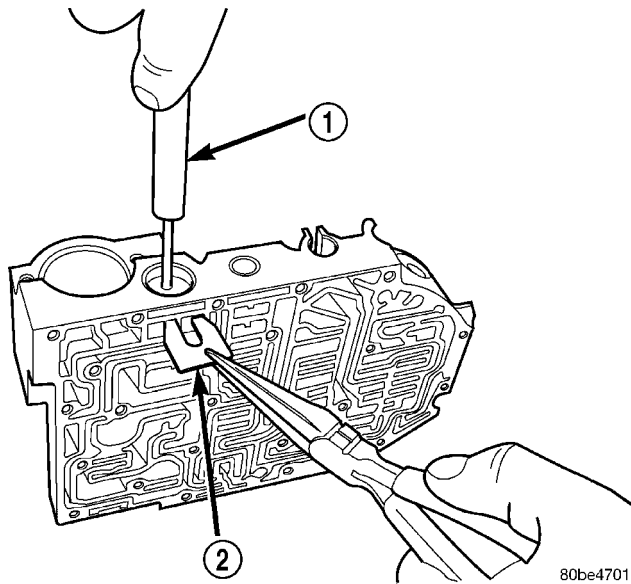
Install Regulator Valve Spring Retainer using Tool 6302
